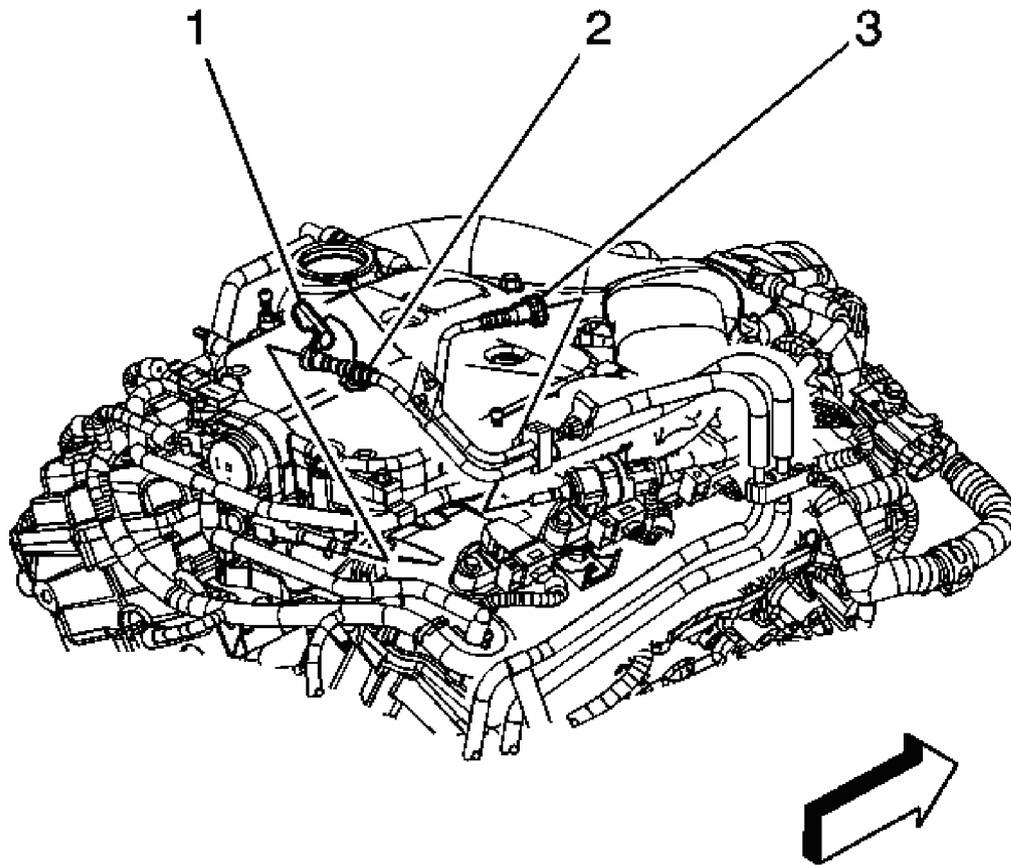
View Of Engine Module Wiring Harness Connectors
